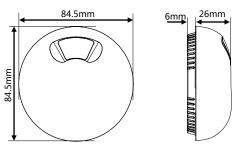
Dimensions - Front View Figure 3. Dimensions - Side View
